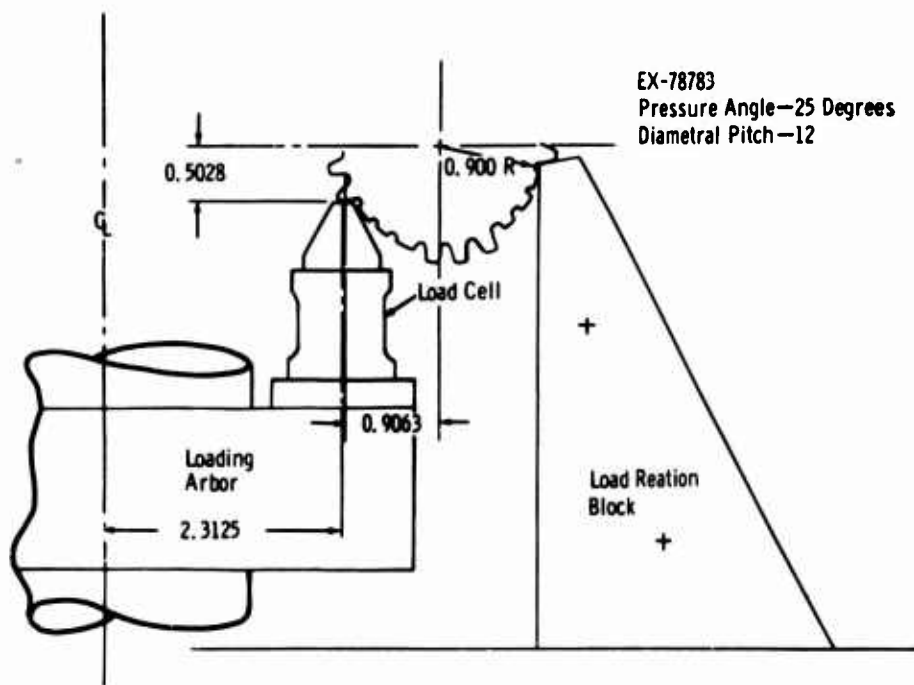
Typical Dimensions of 12-Pitch Gear Test Setup.
